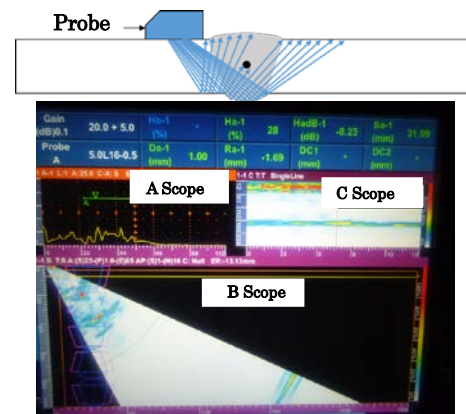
Outline of weld defects inspection using ultrasonic phased array
